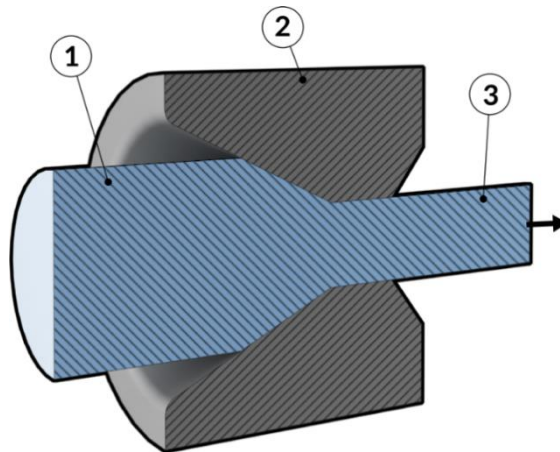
Depiction of wire being drawn to a smaller diameter through a die. 1: wire pre-drawn, 2: the die workpiece, 3: the reduced diameter drawn wire (Image credit: [www.manufacturingguide.com](http://www.manufacturingguide.com))
